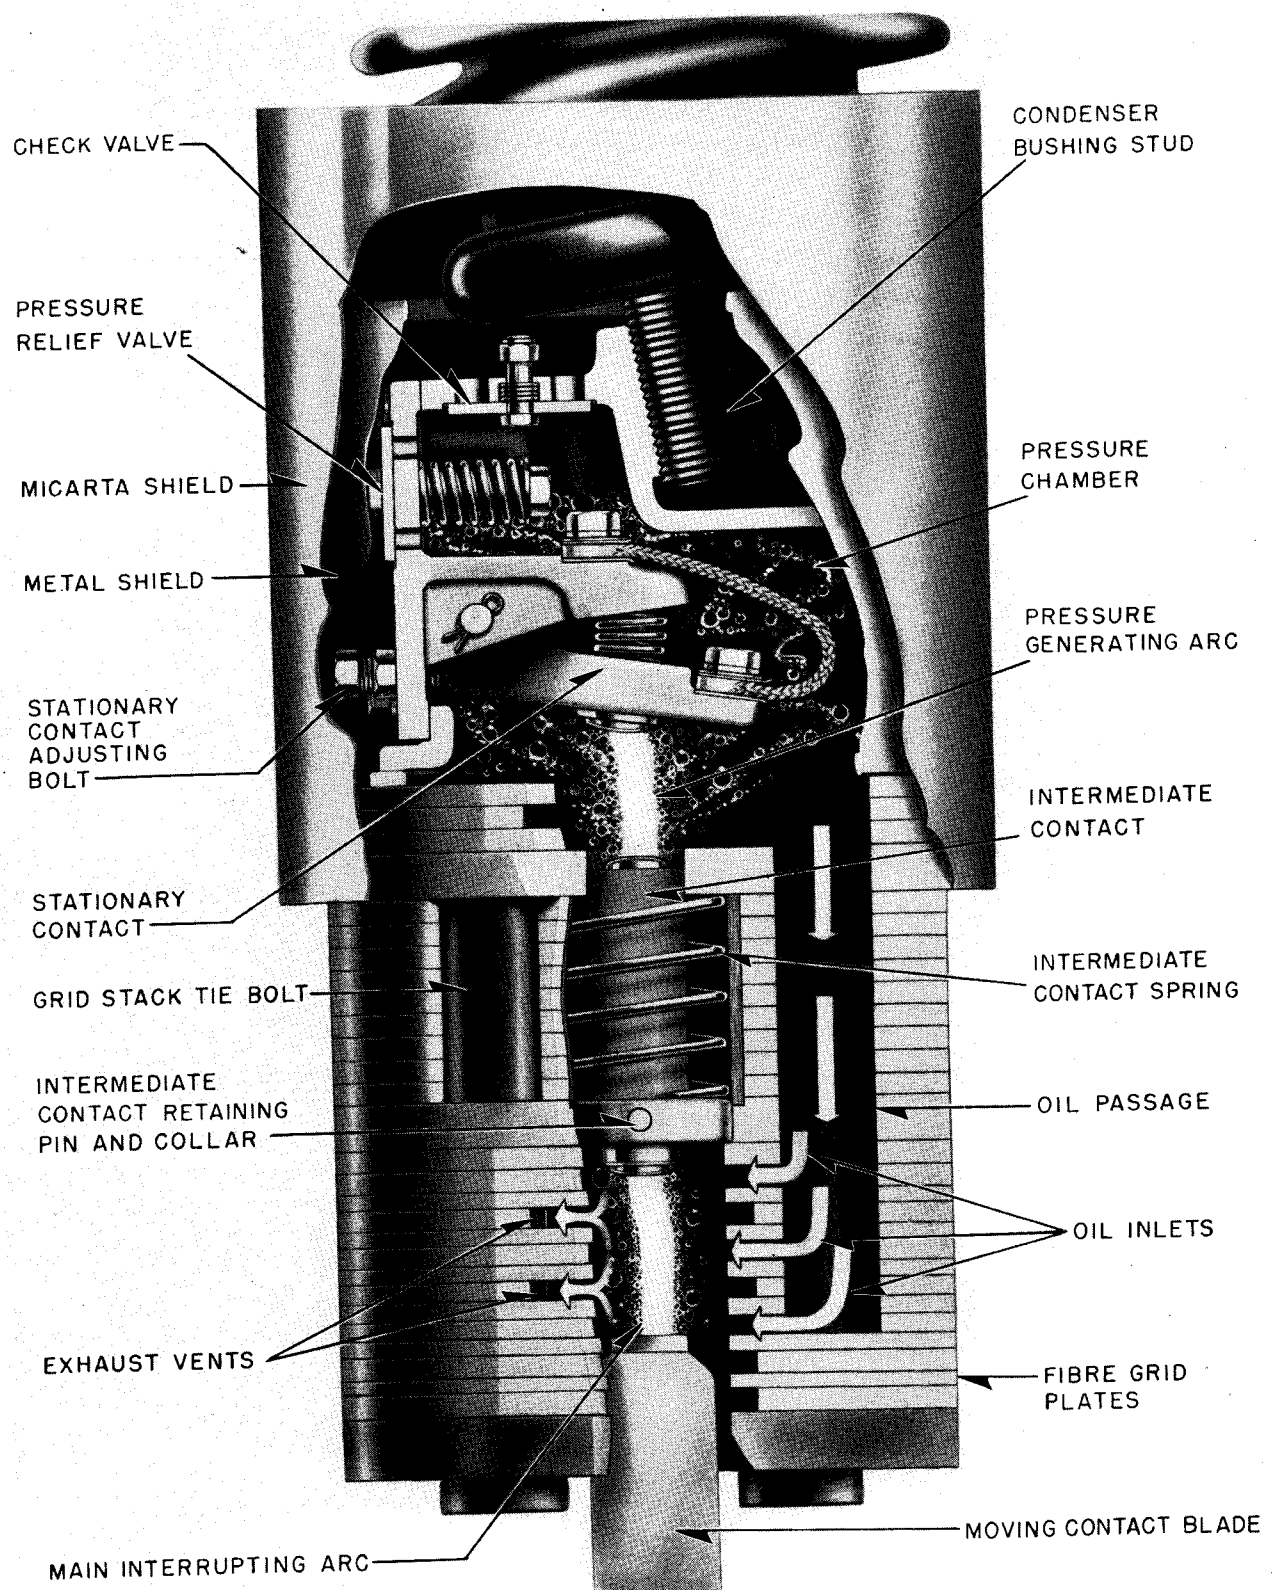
Quarter-Section Cutaway of Contact Assembly
